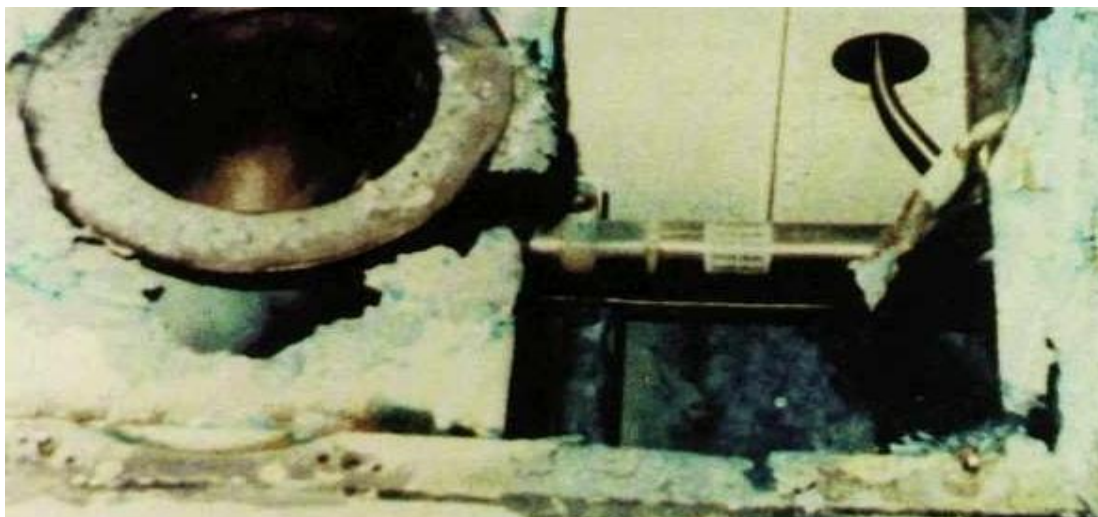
Typical damage to floors around toilets, buffets and kitchens
